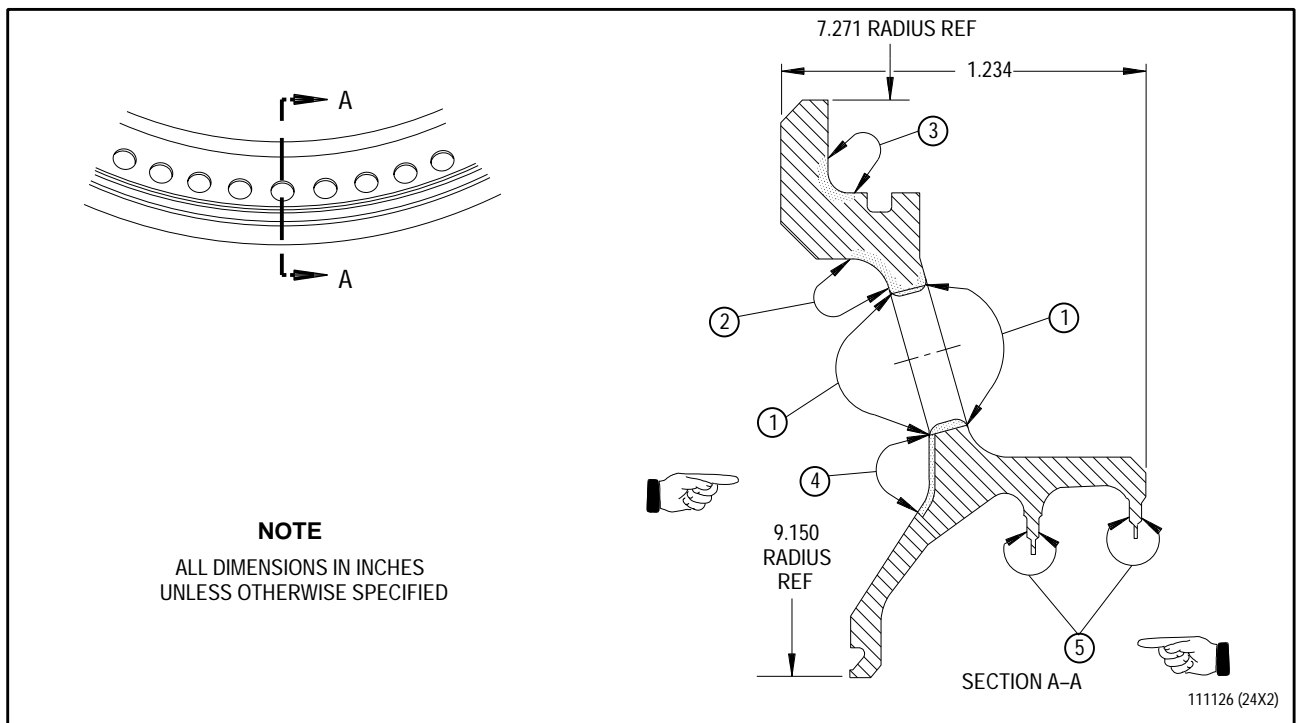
First Stage Turbine Blade Front Retaining Plate - Eddy Current Inspection
